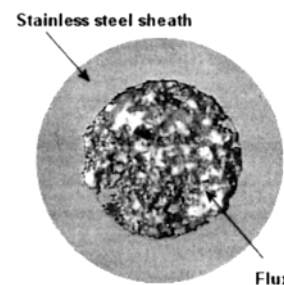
A cross-sectional view of a TGX flux-core filler rod
